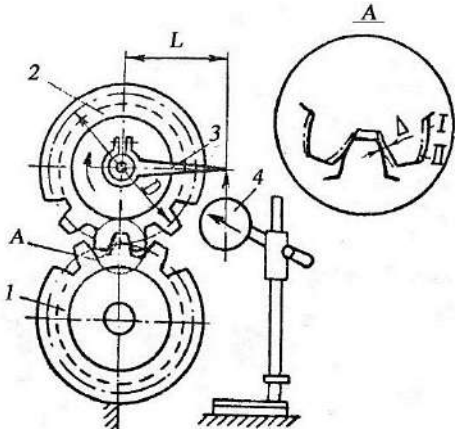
Control of side clearance in interlock of cylinder gear wheels:
